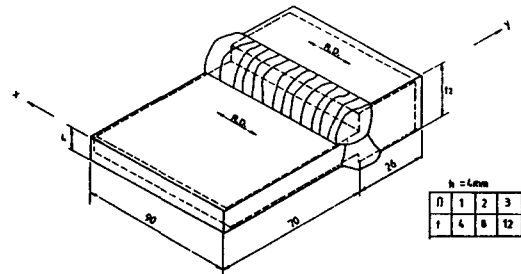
Welding plate configuration and extraction of specimen
